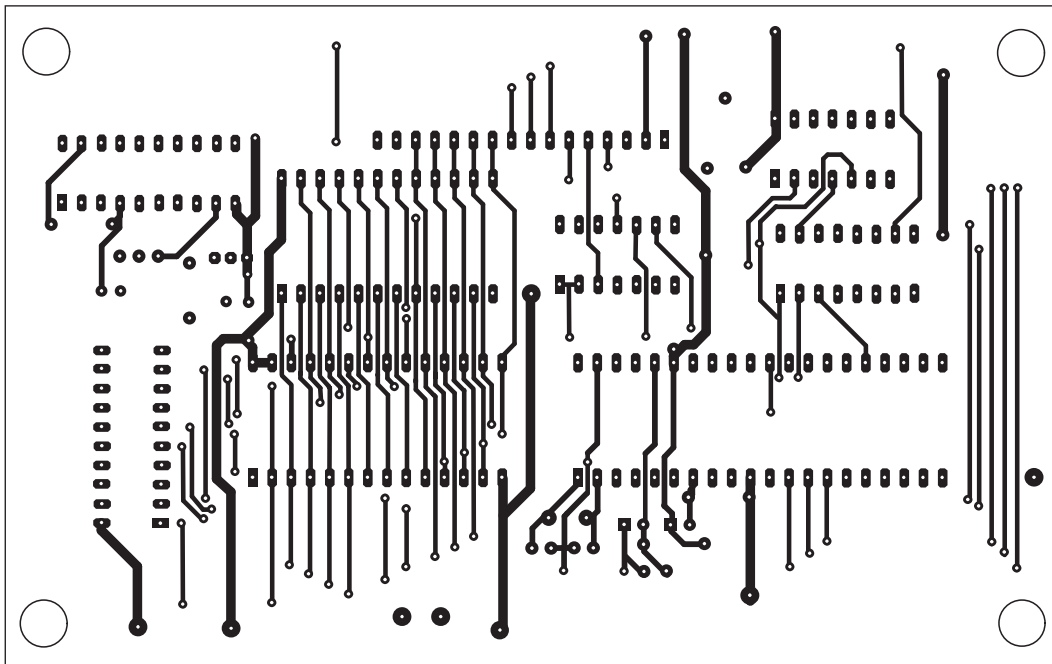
Actual-size, component-side track PCB layout of the microprocessor-controlled thermometer
